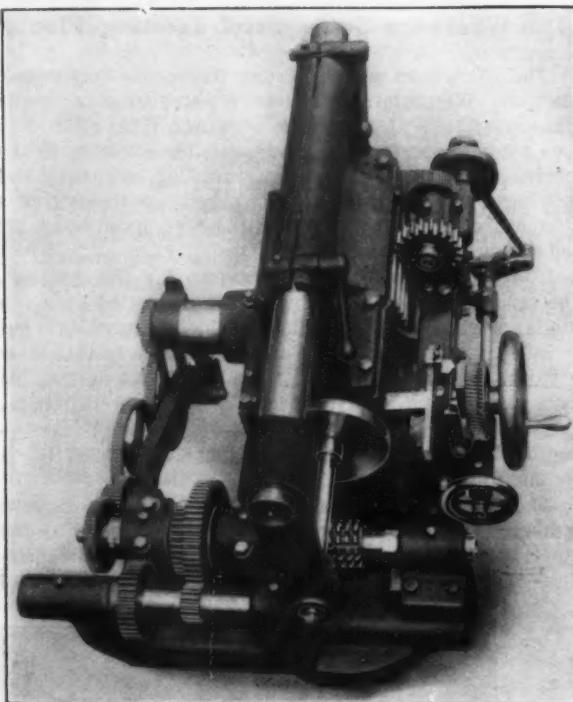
A View from Above the Reynolds Spur Gear Hobber.
